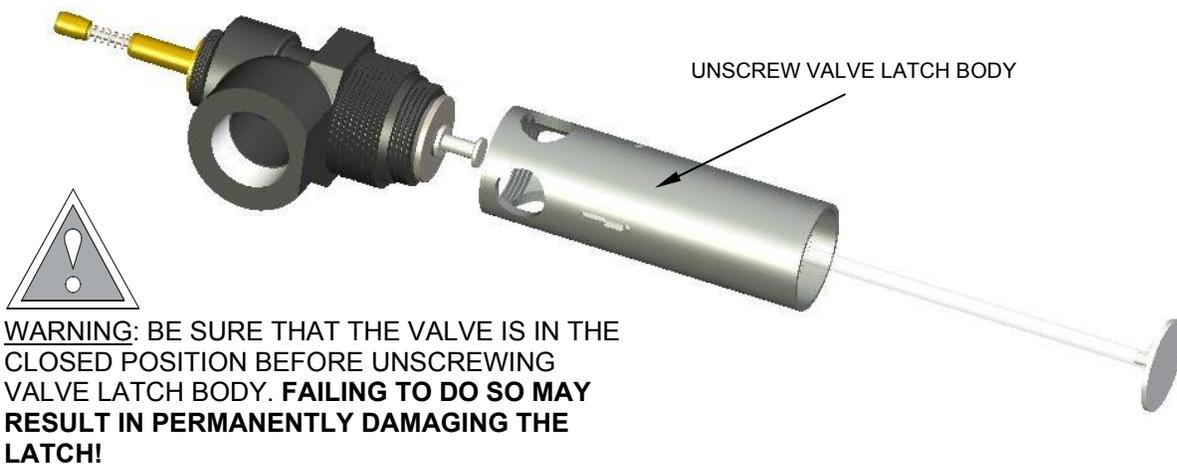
C – STEP 3 – Replace button post internal o-ring
